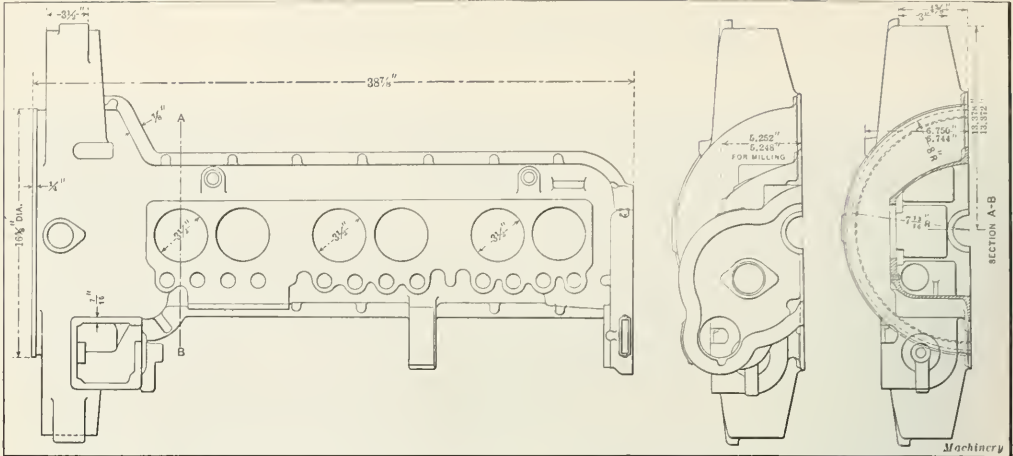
Design of Upper Half of Crank-case for Buick Motor Car
